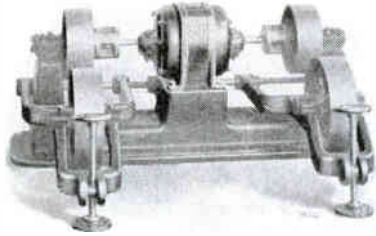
Special Countershaft Device with Motor Base and Belt Tighteners Used for Driving Two-Spindle Shapers shown in Fig. 5
